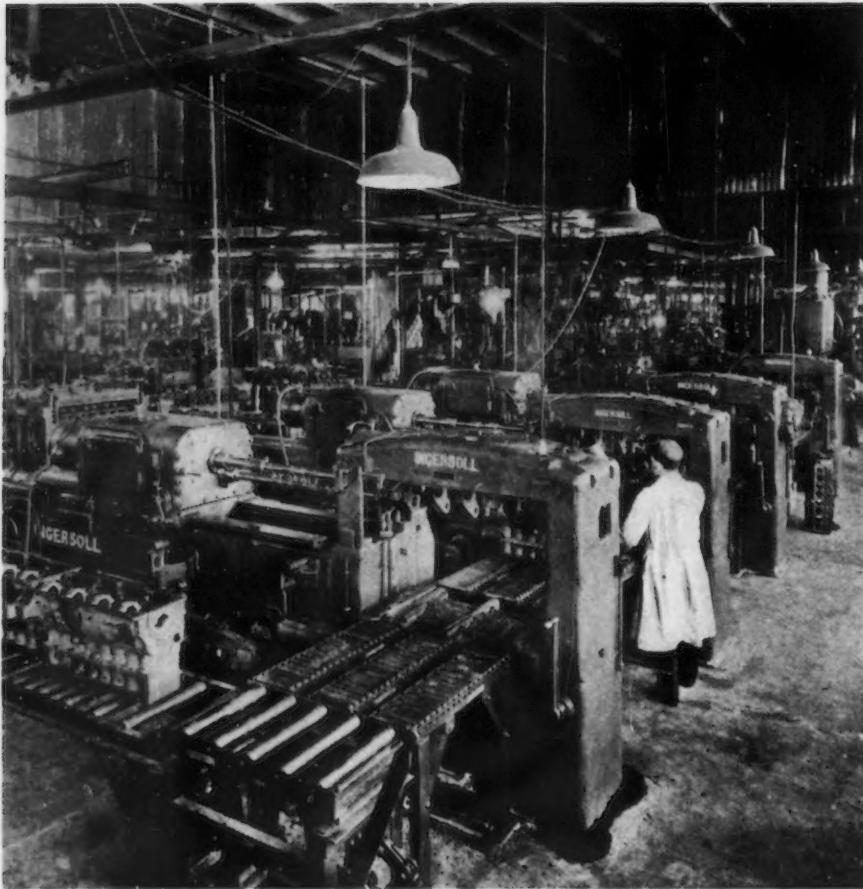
Mathews gravity roller conveyor sections, passing directly through the Ingersoll machining units, coordinate the flow of production on cylinder blocks.
